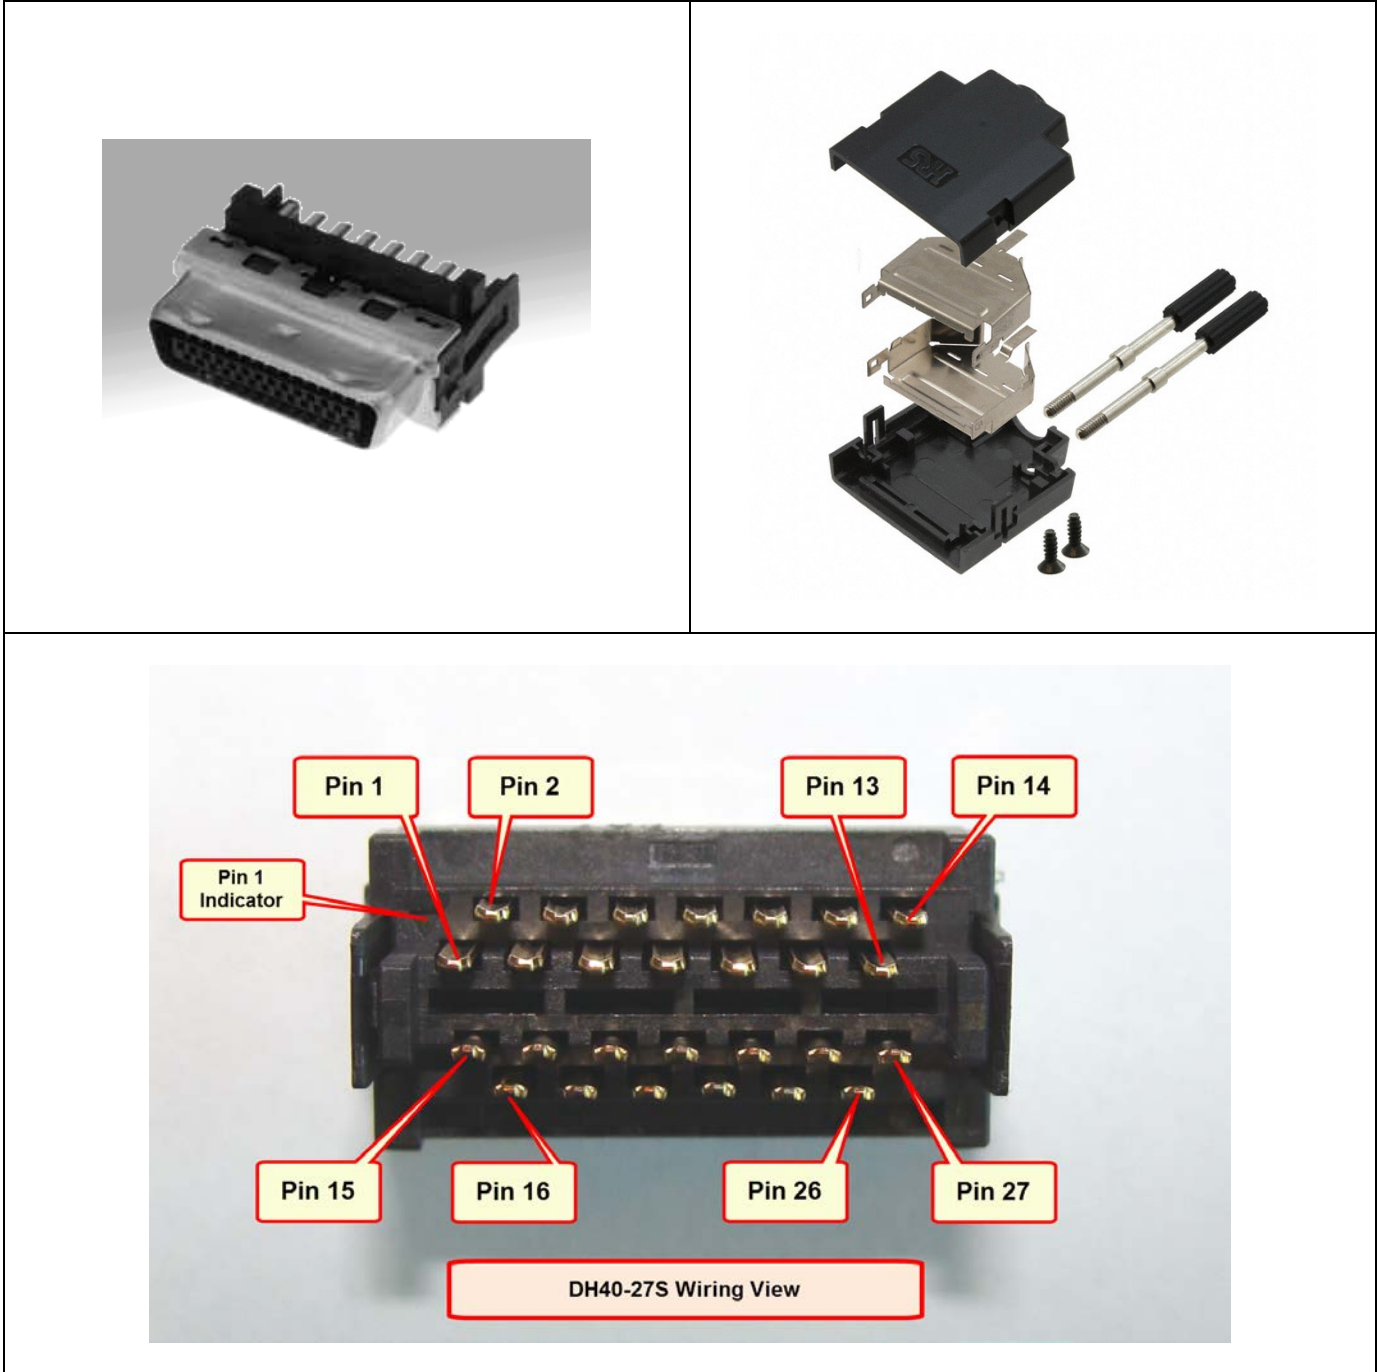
OR-YXCC-H270000 Custom Wiring Kit
